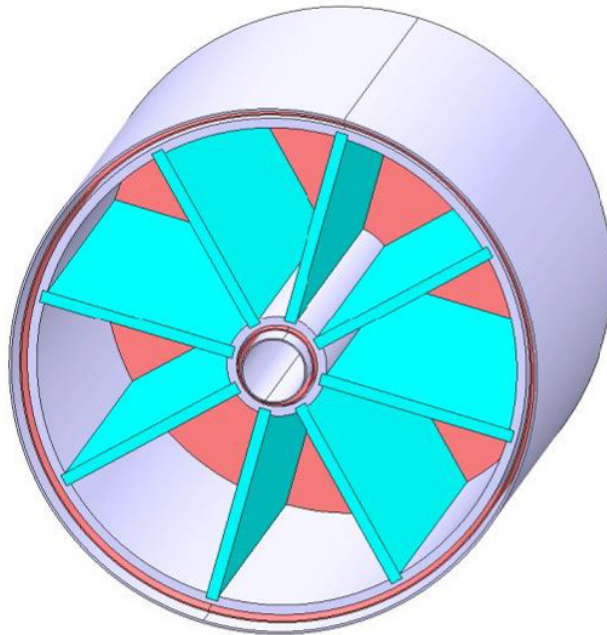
CAD drawing for a 2T air core toroid with 20 cm bore and a size about 1 m³
